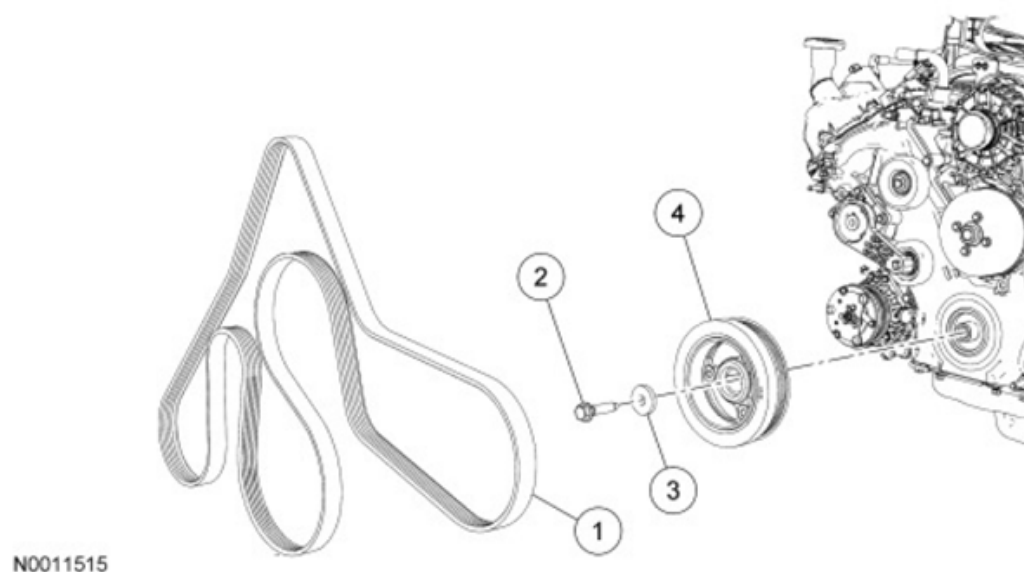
Identifying Accessory Drive Belt, Crankshaft Pulley Bolt, Crankshaft Pulley Bolt Washer And Crankshaft Pulley
